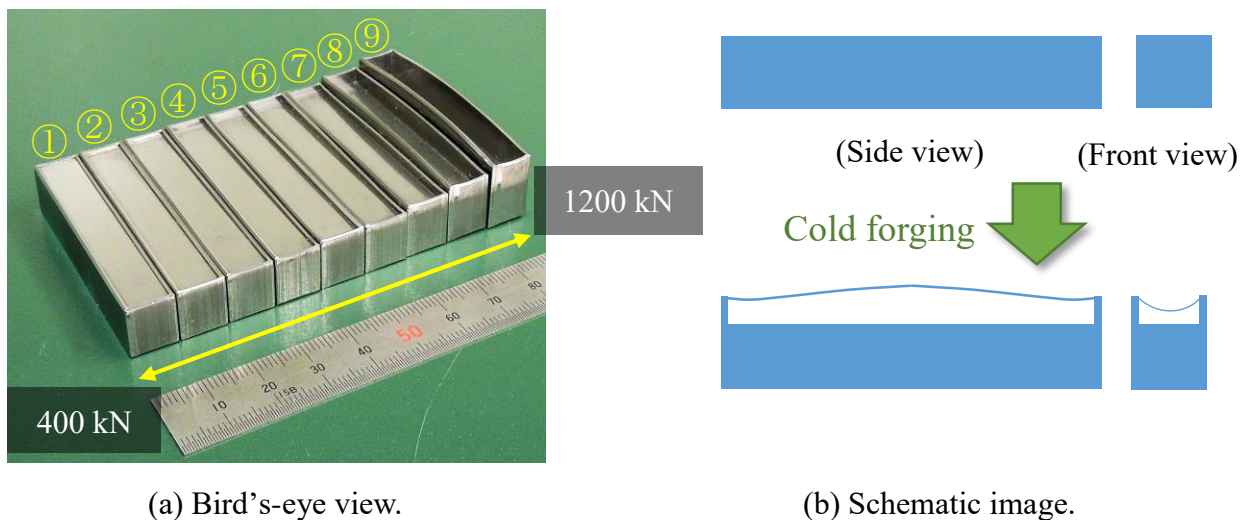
Appearance and shape of cold-forged specimens.
